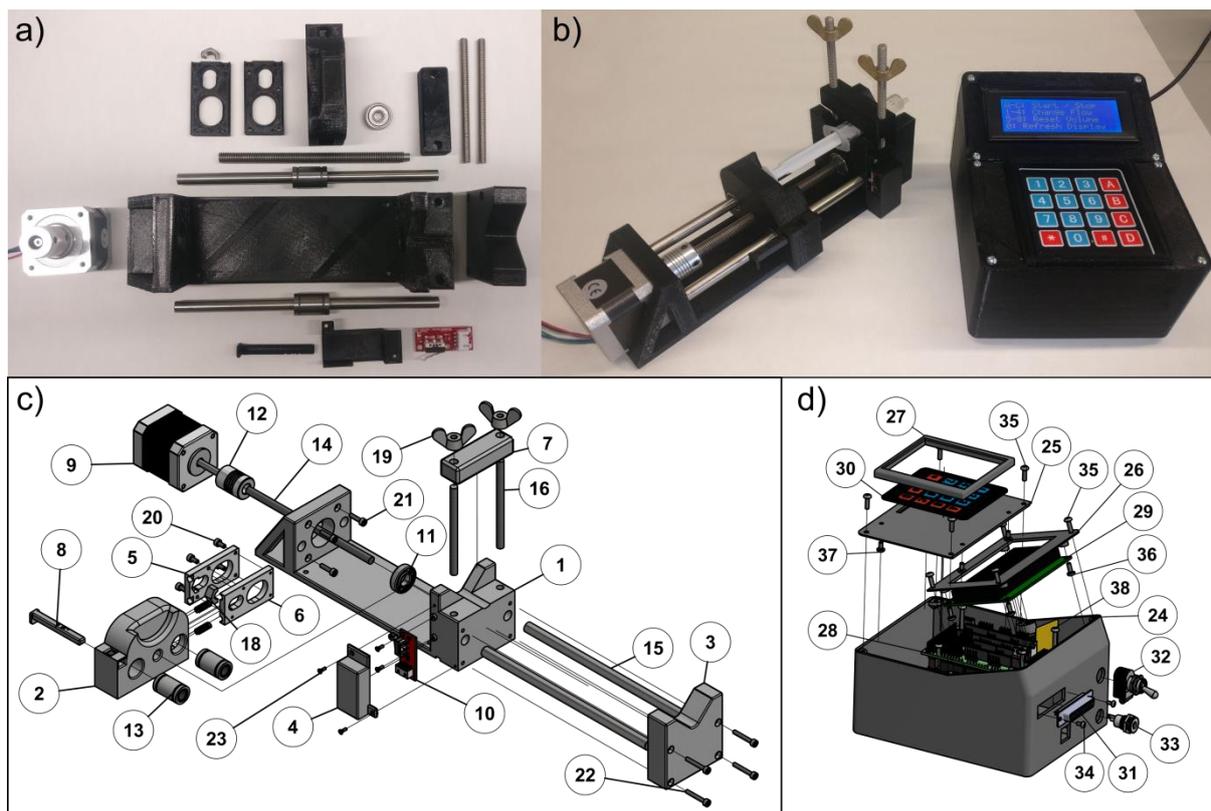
a) Unassembled parts used for one syringe pump. b) Assembled syringe pump and controller c) Exploded-view CAD drawings of the pump. d) The controller.
